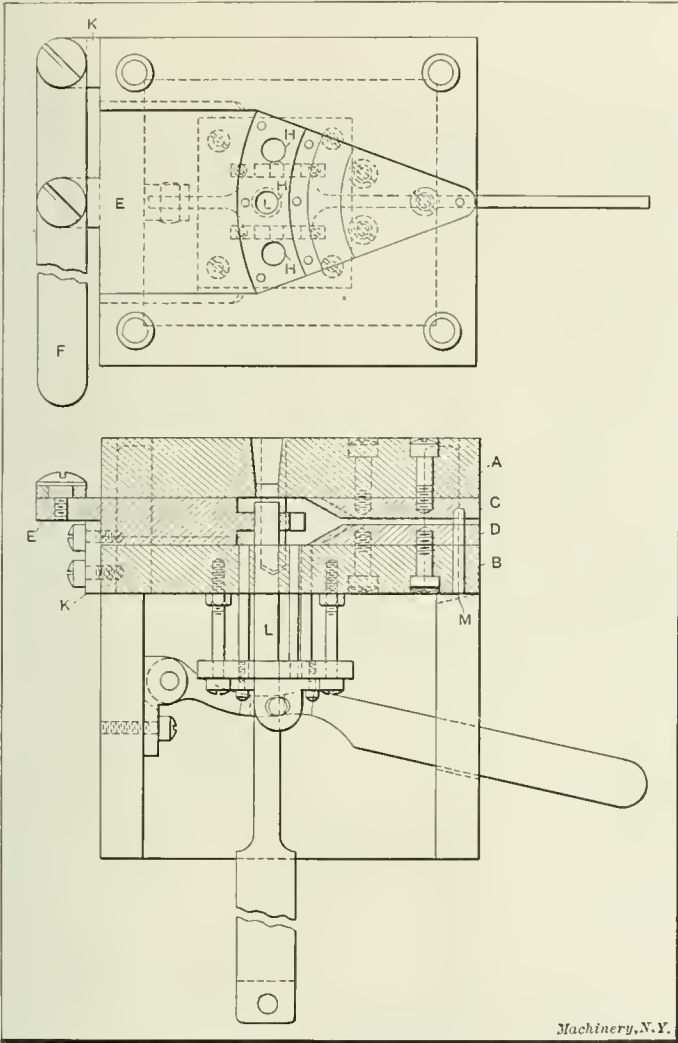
Casting-die for Making Castings with Inserted Pieces like that shown in Fig. 10
